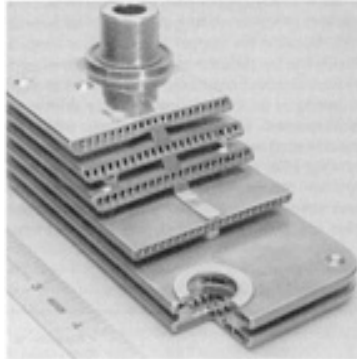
AUTOMOTIVE ENGINE OIL COOLER MANUFACTURED WITH CLAD BRAZING MATERIALS
